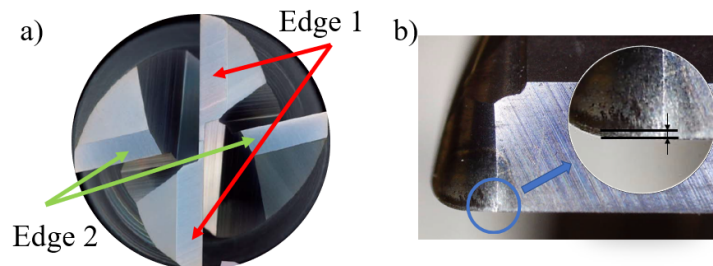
a) Edge naming in Tool T2; b) Tool wear on cutting edge 1 after cleaning machining.
